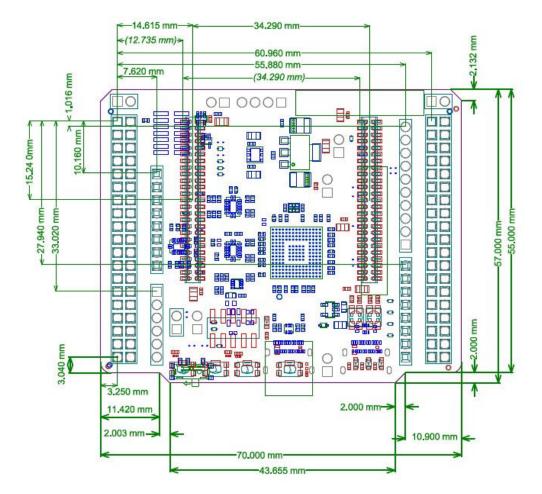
NUCLEO-WBA55CG (MB1801D) mechanical dimensions (in millimeters)
